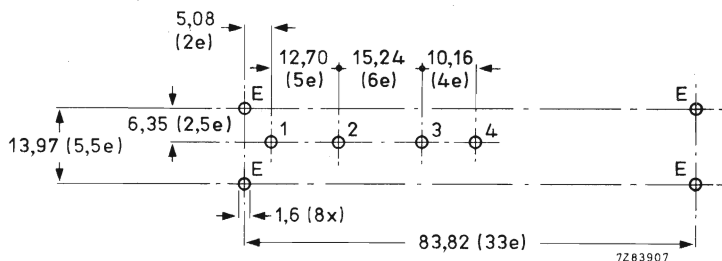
Piercing diagram viewed from solder side of board; $e = 2,54$ mm (0,1 in).
